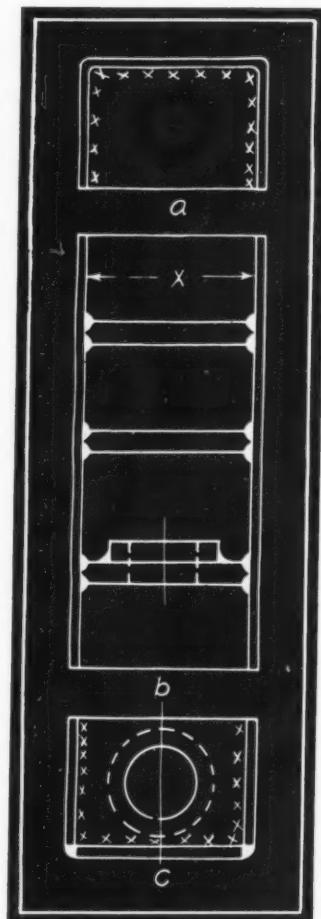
Shrinkage must be carefully considered when welding a partitioned assembly
